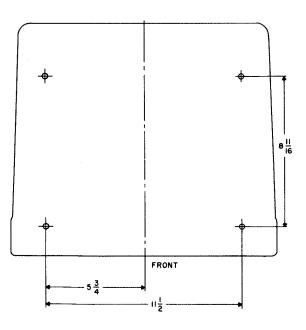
Tactical Case CY-2976/PG, Low Vibration Installation, Mounting Holes Location
